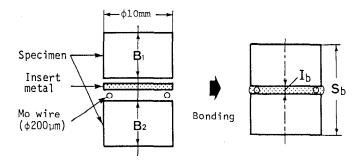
Prebond alignment of the piece being joined and bonded test piece
